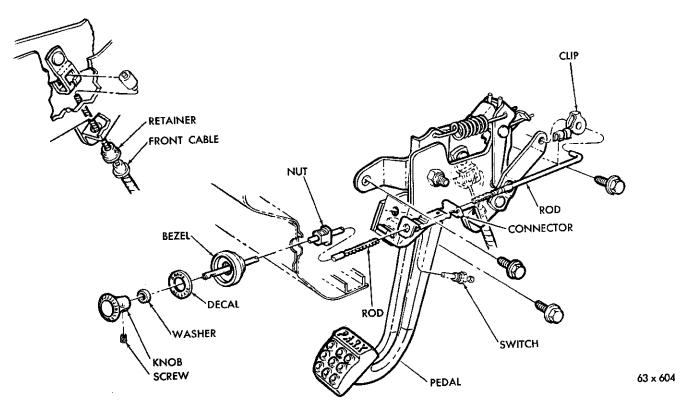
Foot Operated Parking Brake (Chrysler) (Disassembled)
